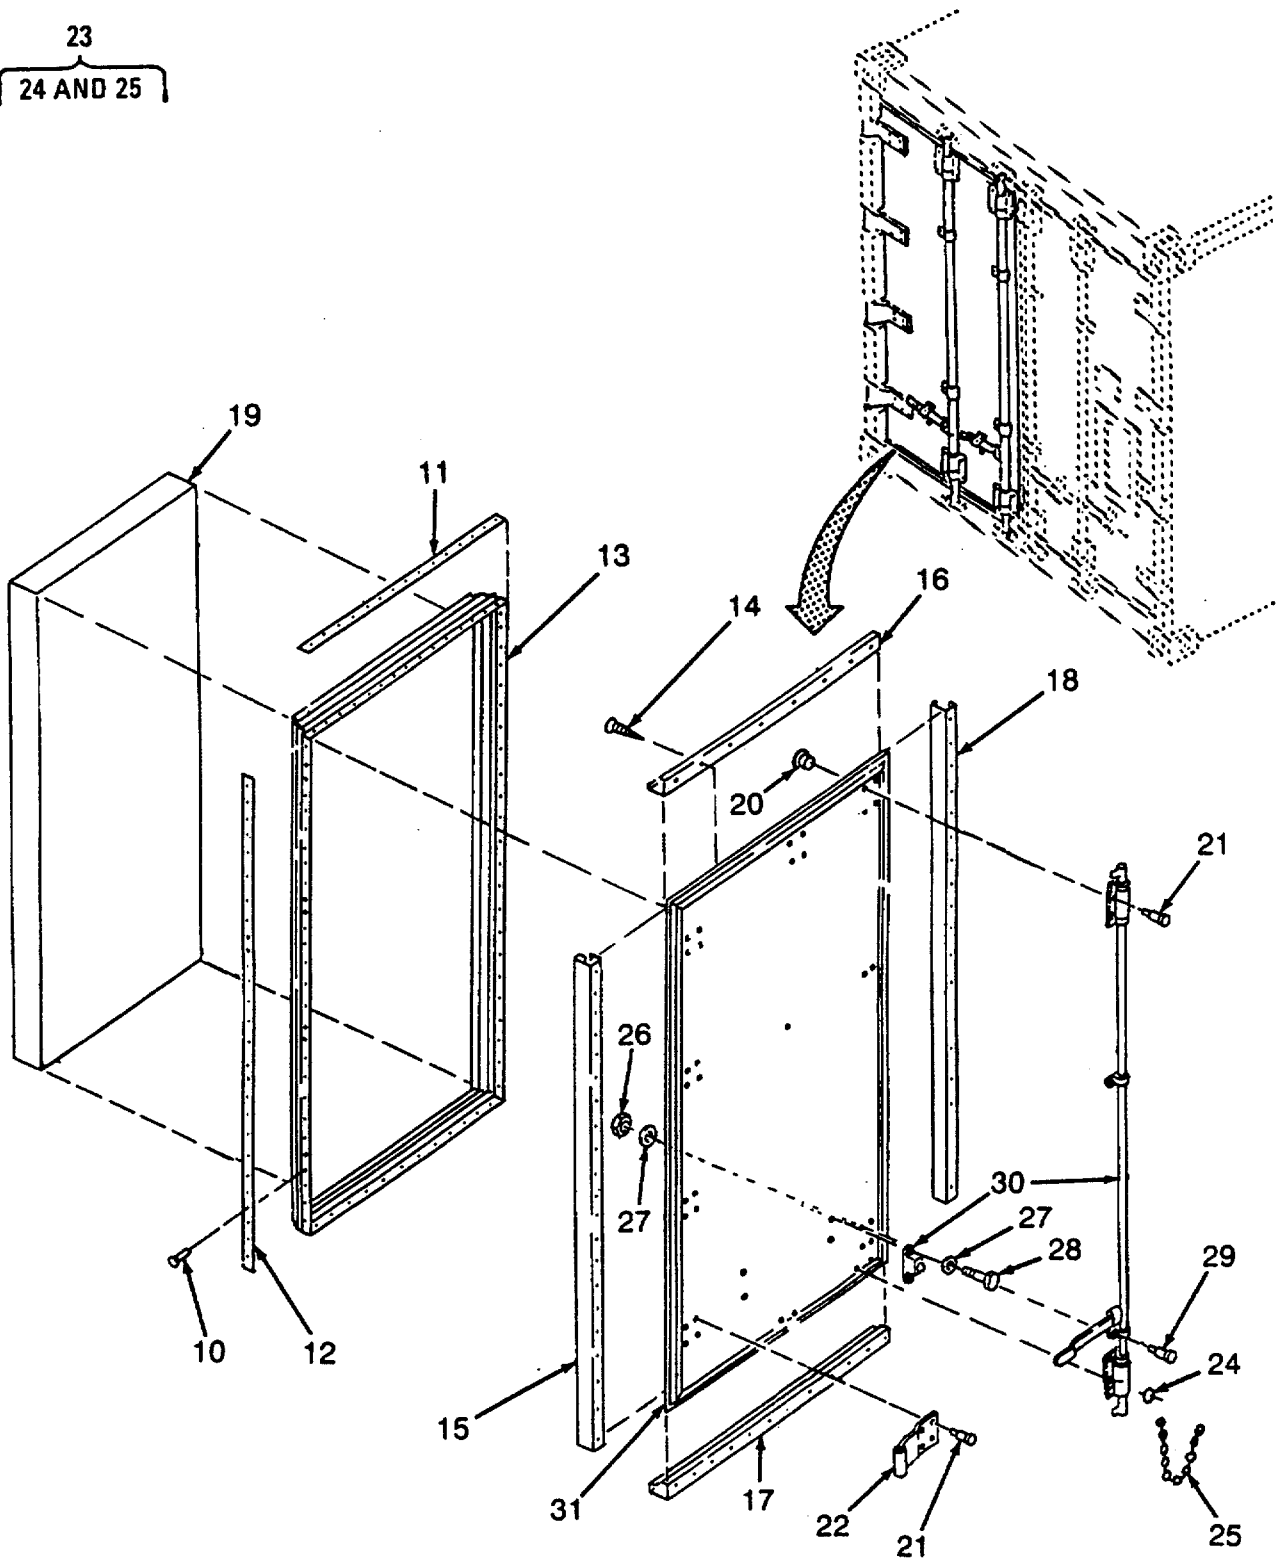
Left Hand Door Assembly( Sheet 2 of 2)
